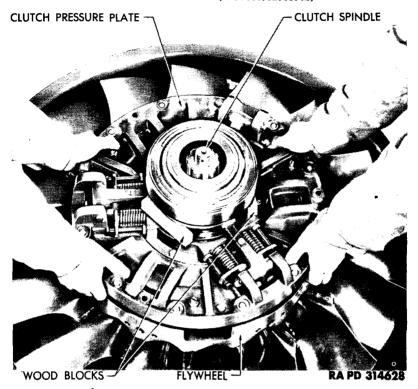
Removing Flywheel Ring and Clutch Pressure Plate
